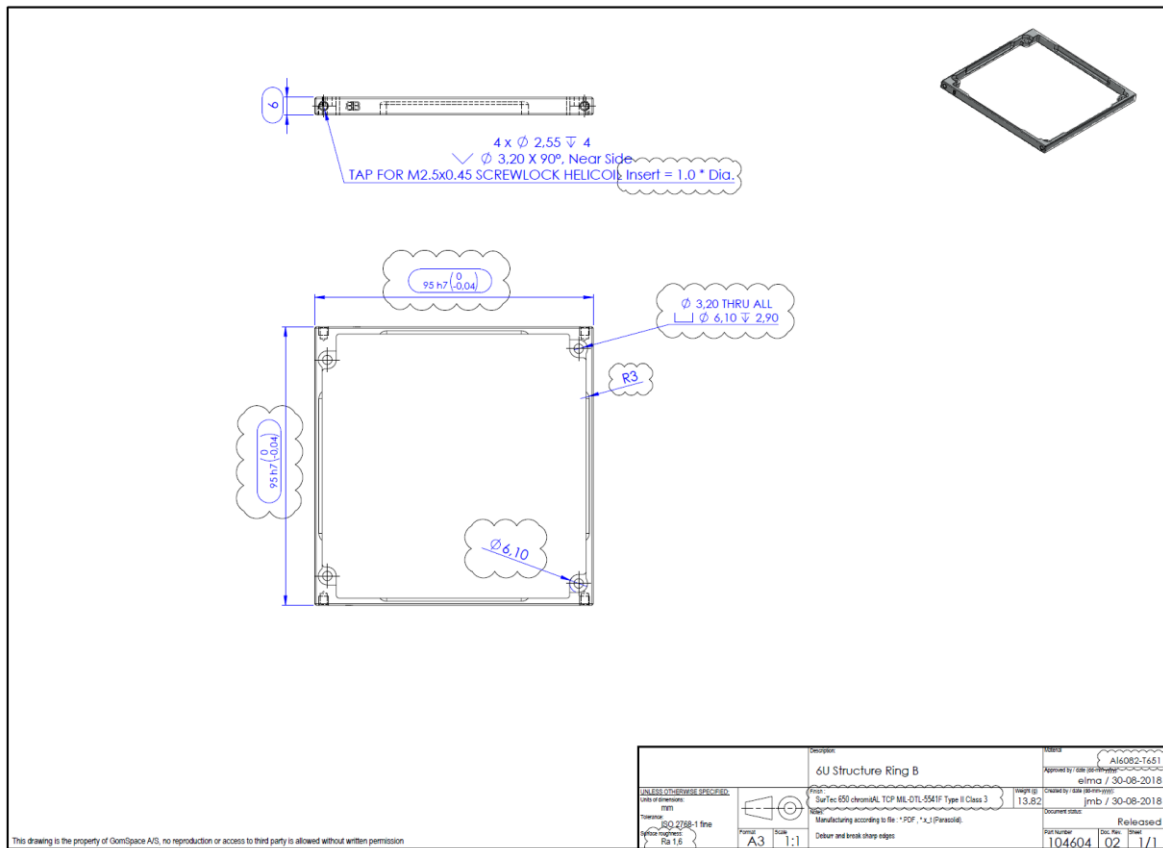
GomSpace Ring Assemblies Examples – Production Drawing and Recommended Tolerances
